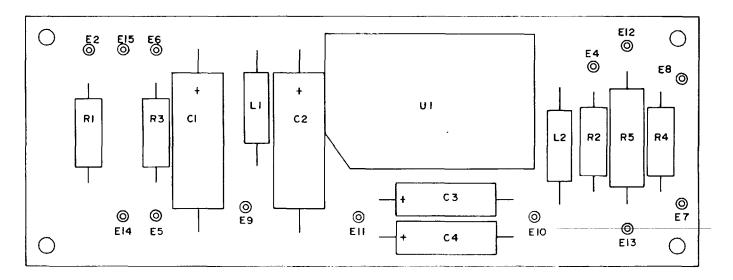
Meter Card Circuit Card Assembly, 1A5A6 Parts Location Diagram
